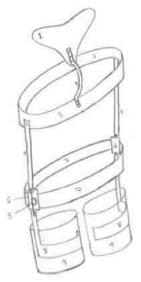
Flat Coil Torsion Spring Frame Component. This is the frame component design that utilizes a flat coil torsion spring so that no leg cuffs would be needed.
